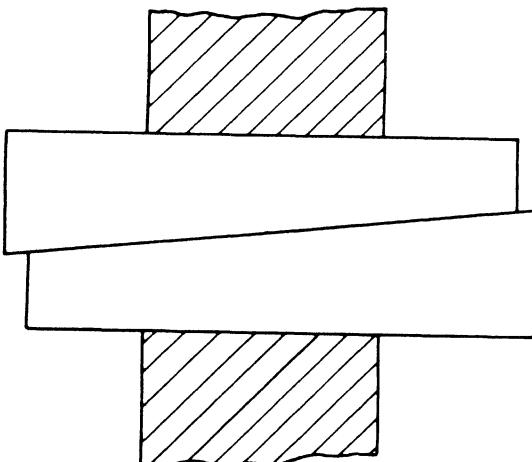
Illustration showing how tapered parallels may be used to measure inside diameters.
